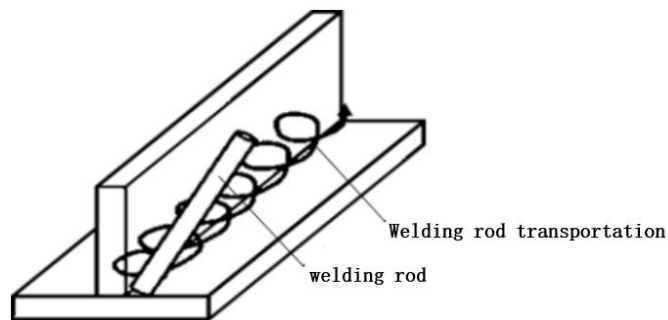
Circle shaped strip transportation method for flat fillet welding
